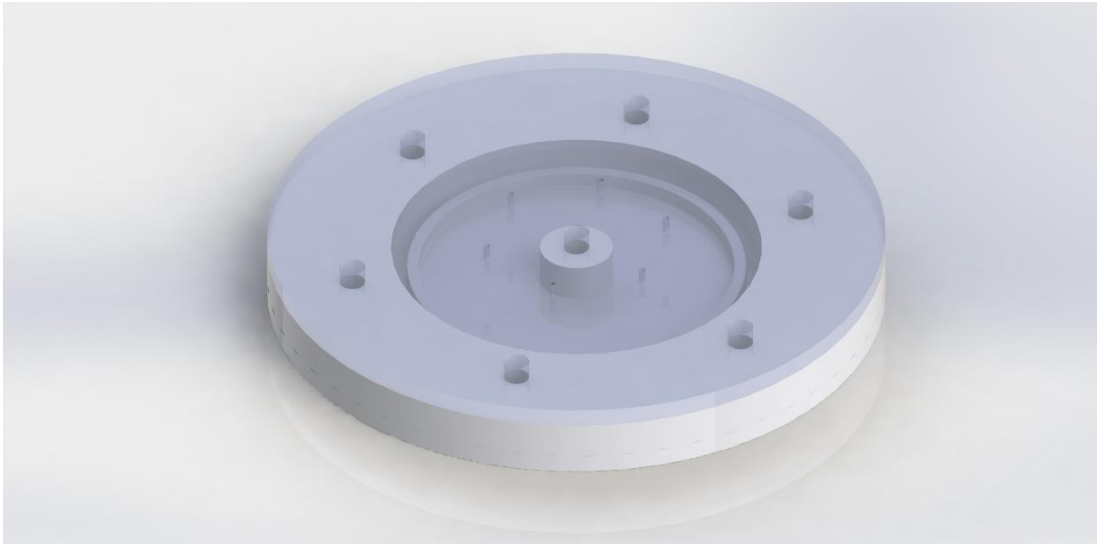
Rotor Cast Form 1st Version, All 3 Parts.
